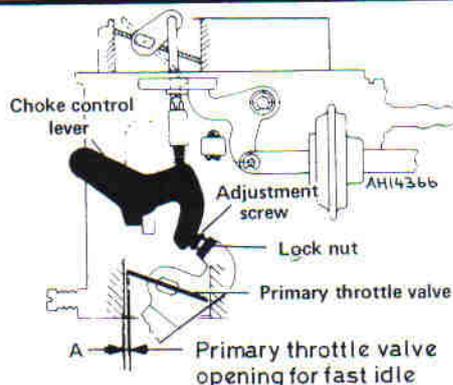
Fast idle setting diagram for Weber 30/32 DMTR carburettor (Sec 15)
